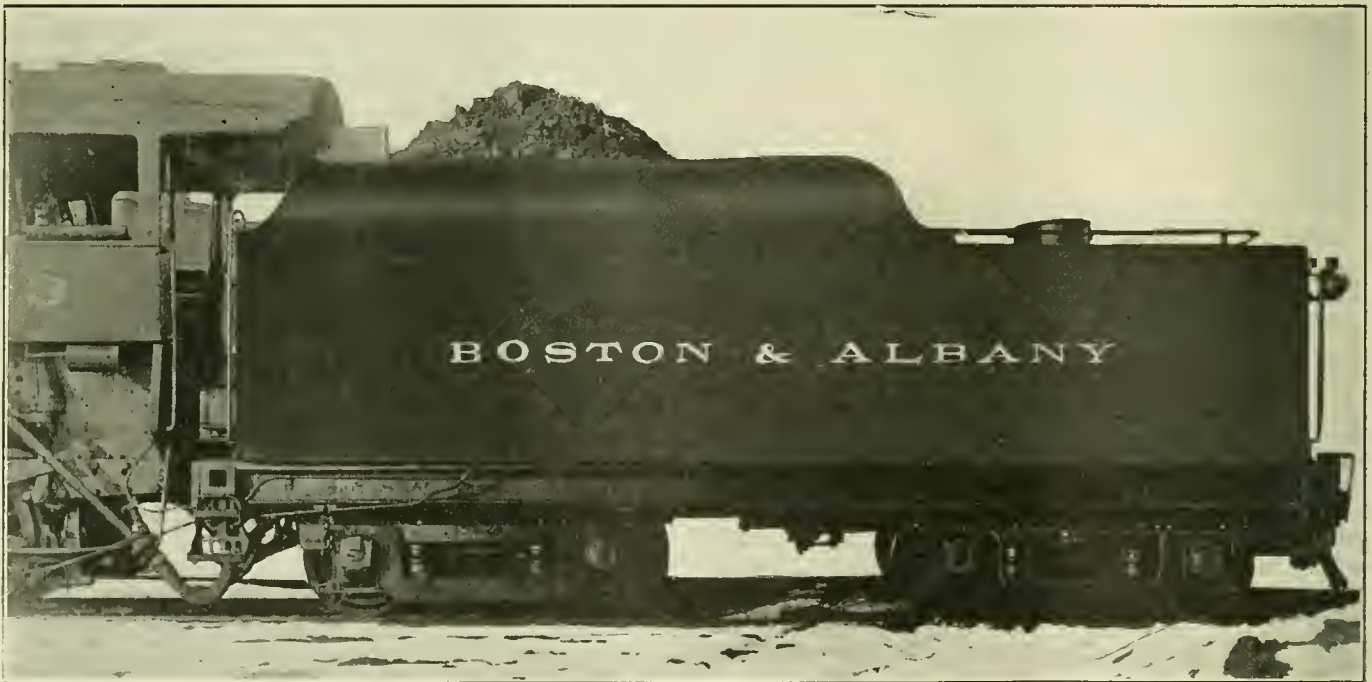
All Seams in This Tender Were Joined by Electric Welding
